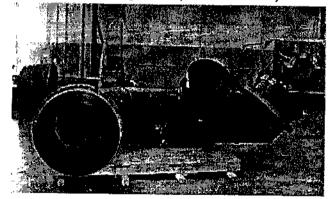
Fused Manifold Assembly with Flange Adapters and Back Up $\mathsf{Ring}\mathsf{is}$
